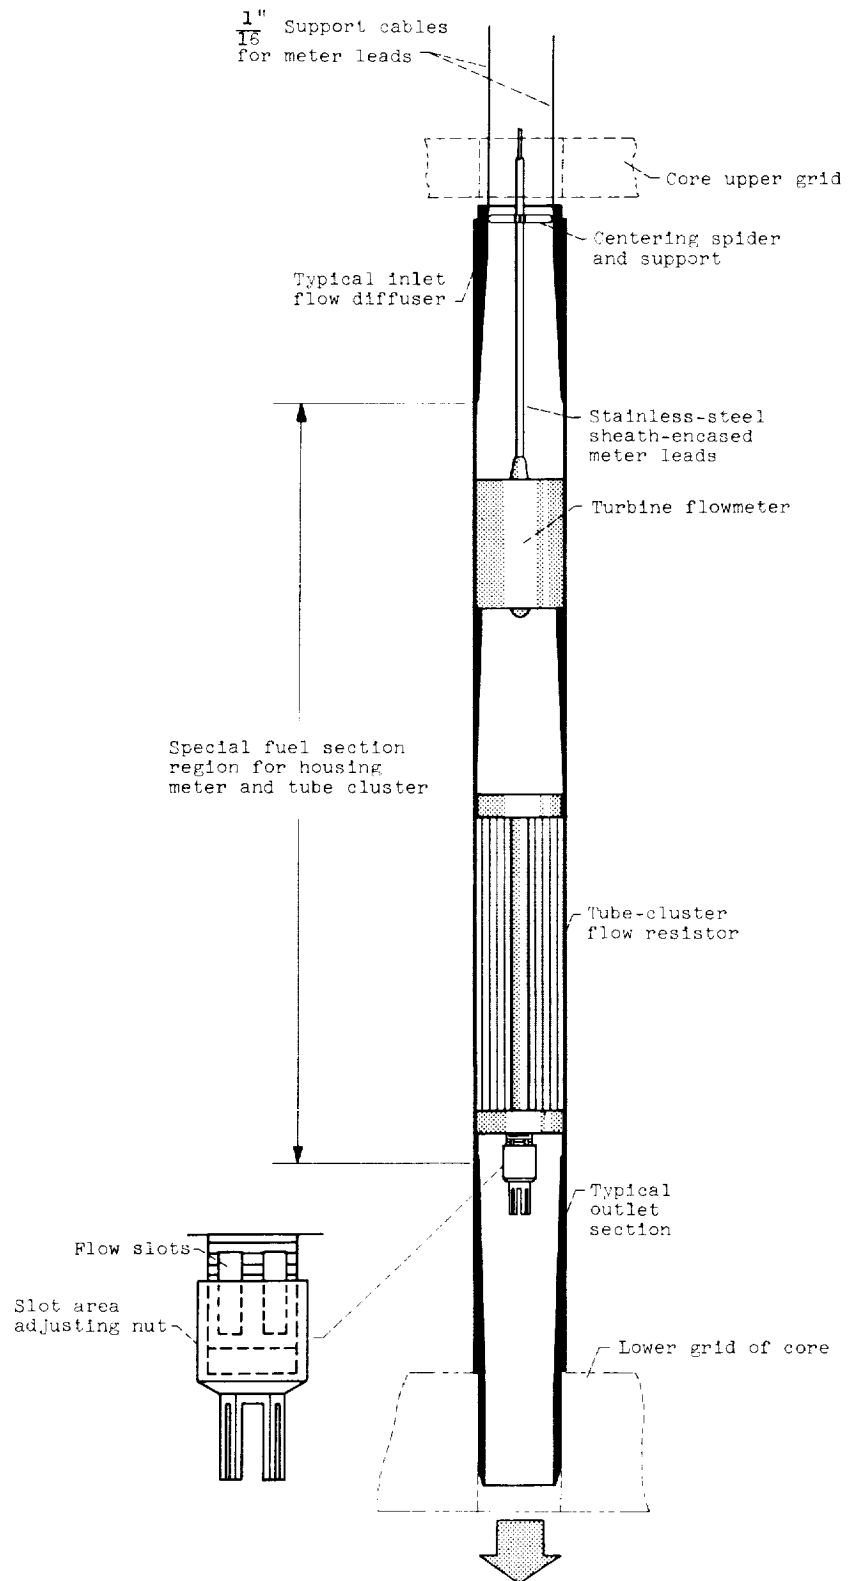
Schematic arrangement of simulated fuel assembly.
